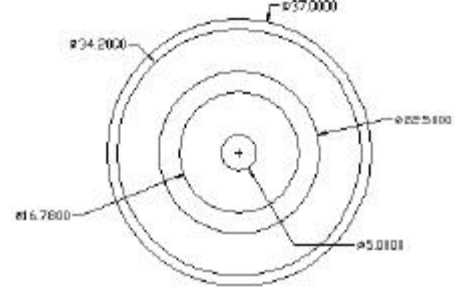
Dimensions of the TCB electrode designed. Units expressed in millimeters.
